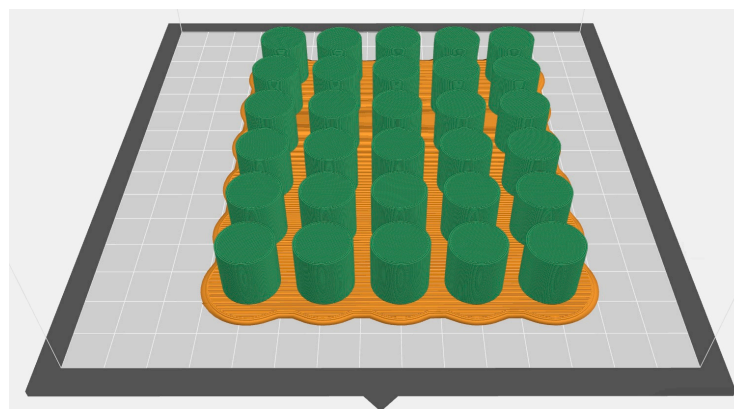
Placement of sample models on the virtual 3D printer platform in MakerBot Print.
